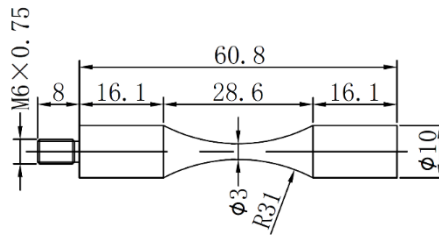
Specimen geometry (units: mm) for fatigue tests [3].
